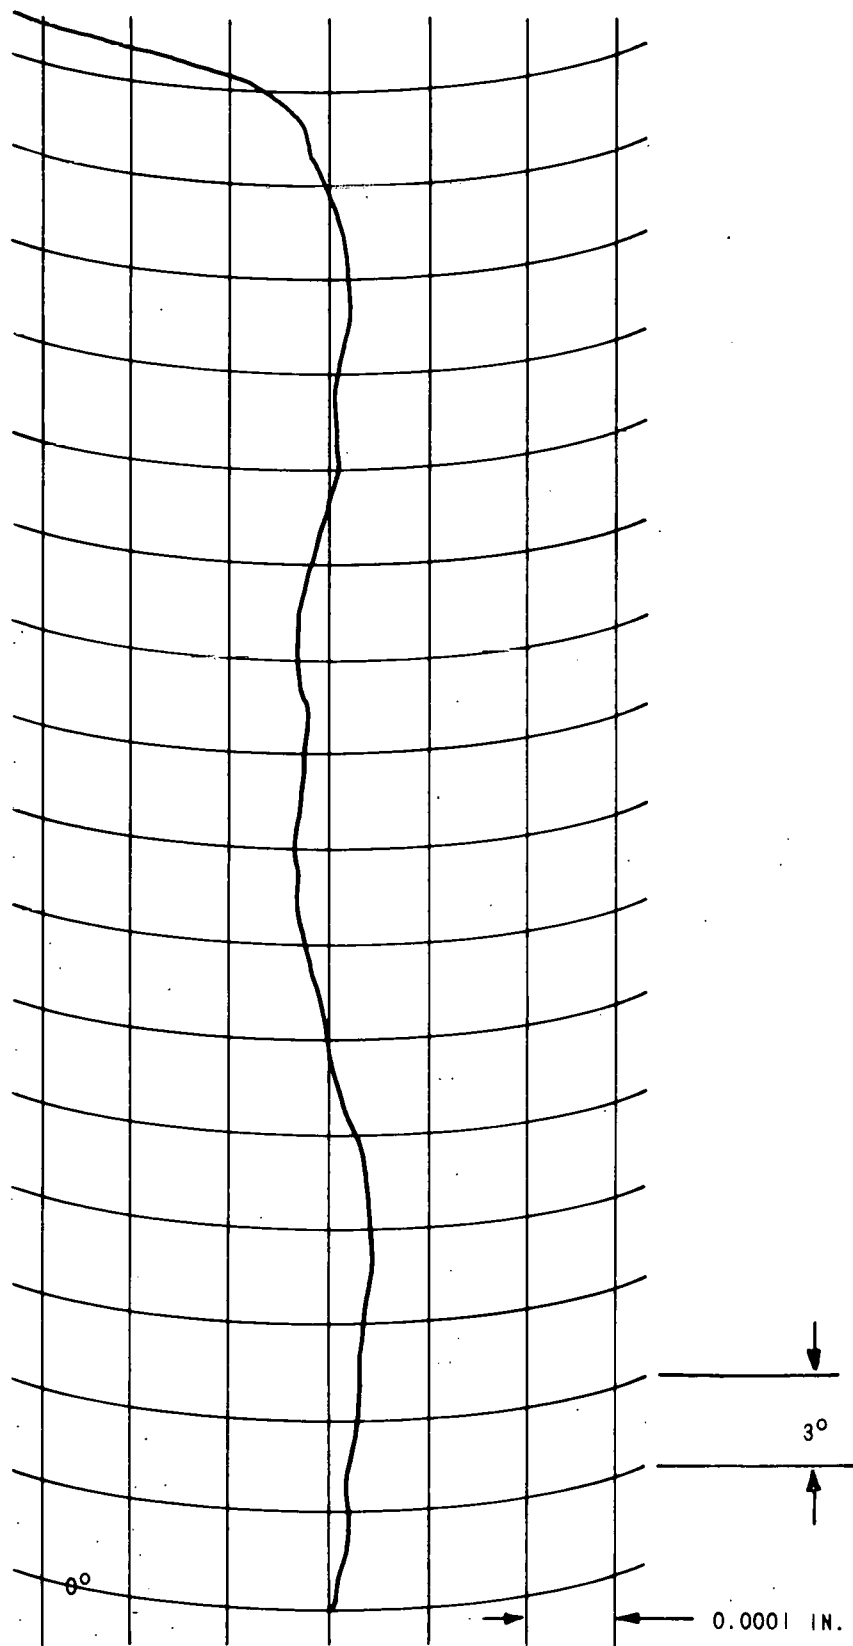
Typical Involute Profile Recorded on Fellows 12-M Involute Machine
